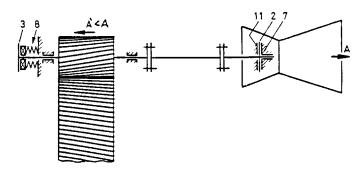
Thrust splitting between gas turbine and gearbox. (Source: MAAG Gear Company.)
